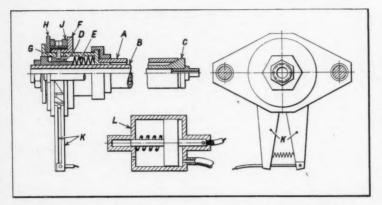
Sectional views showing the arrangement of the collet-closing and -opening equipment on the RB 34 lathe. A brake is automatically applied to the spindle as the collet is opened
